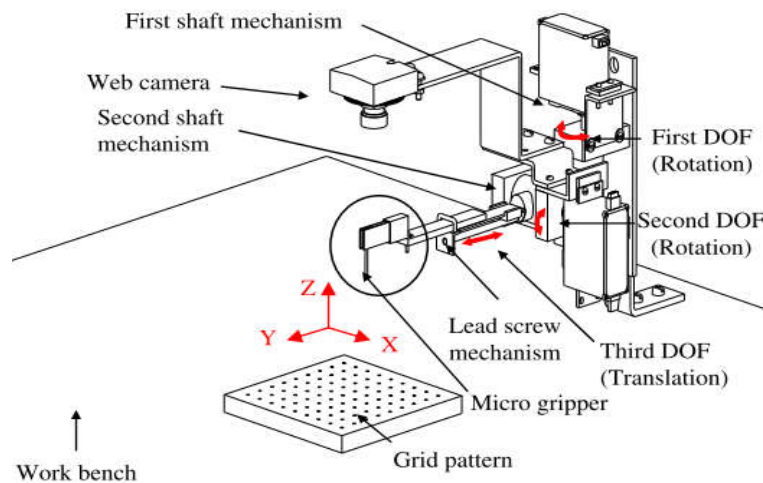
21: Robotic Peg-in-hole Assembly [88], [89]
